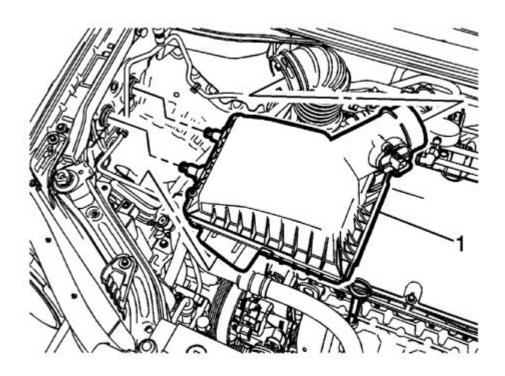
Air Cleaner Assembly Courtesy of GENERAL MOTORS COMPANY
